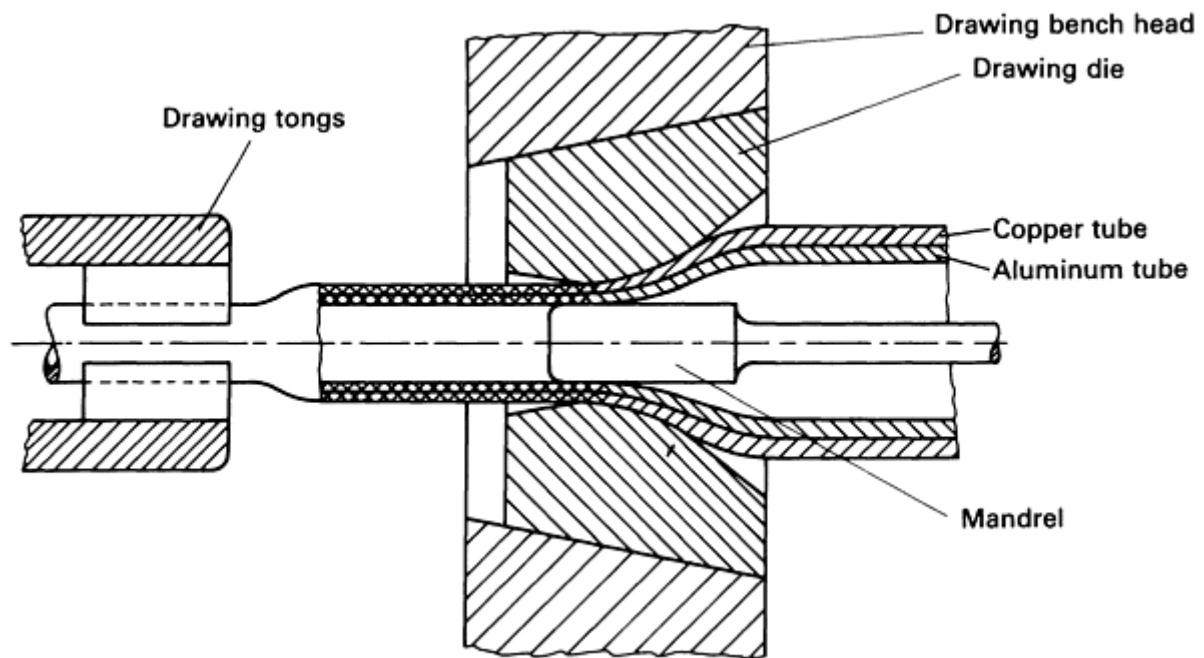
APPLICATION OF DRAWING TO COLD PRESSURE WELD MULTILAYER TUBES INCORPORATING COPPER ON THE OUTSIDE DIAMETER AND ALUMINUM ON THE INSIDE DIAMETER
